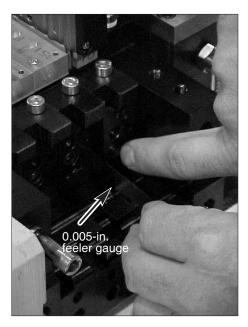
Using a feeler gauge to install the last adhesive diverter plate
